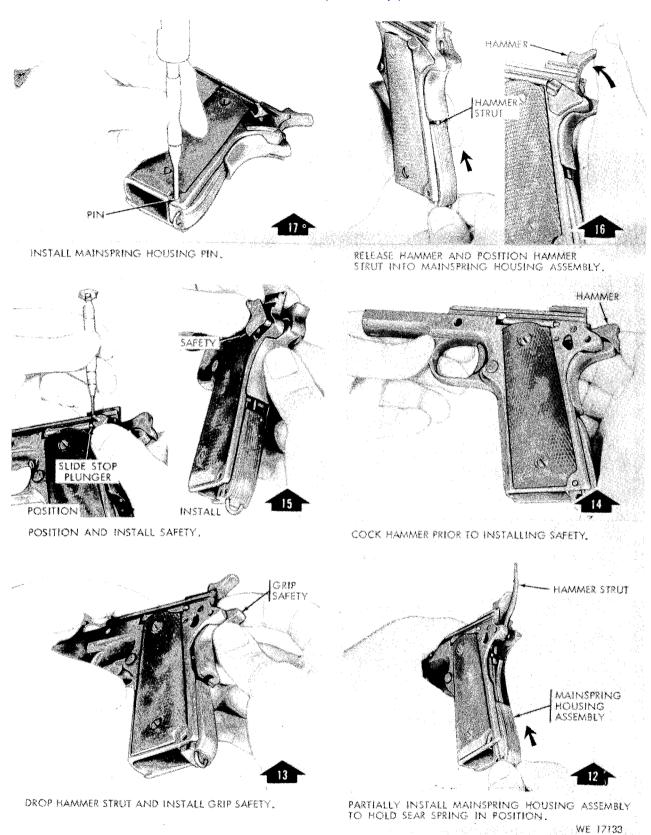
Organizational disassembly/assembly fo Caliber .45 Automtic Pistol, M1911A1. (3 of 6)
